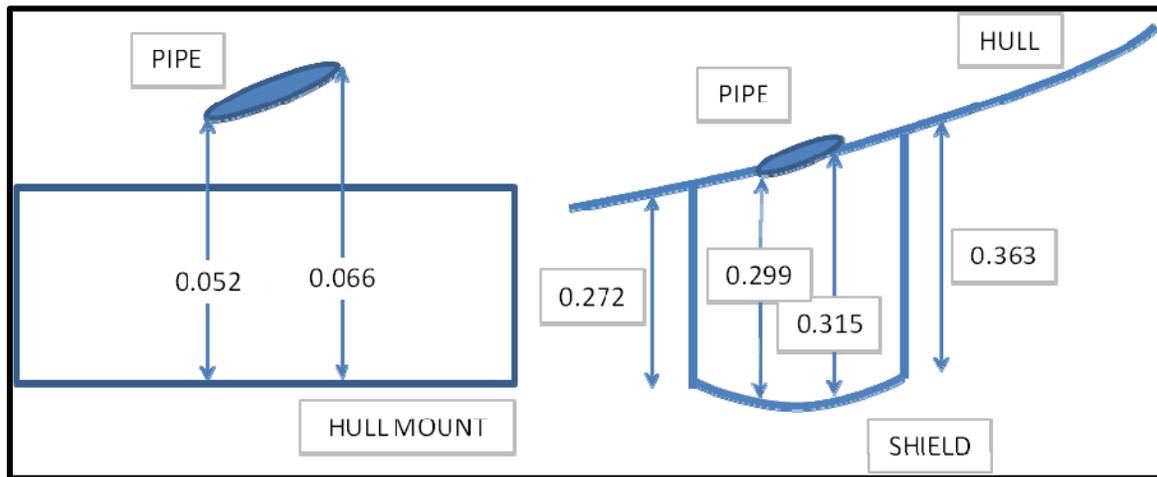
Layout of Pipe, Transducer Hull Mount, and Shield (Looking Aft) with Taped Distances
